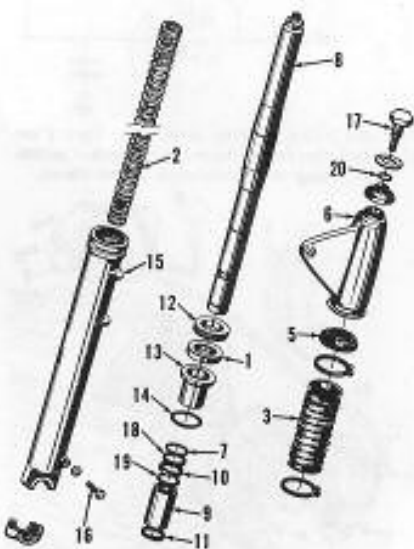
Exploded view of front suspension unit used on late CL models.
